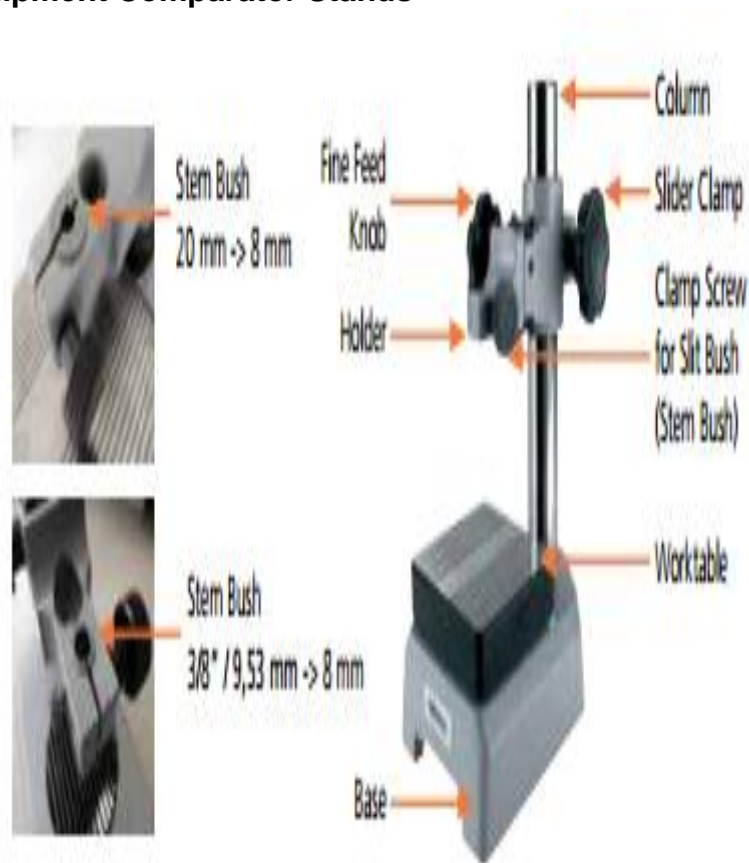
parts of Auxiliary Equipment Comparator Stands
